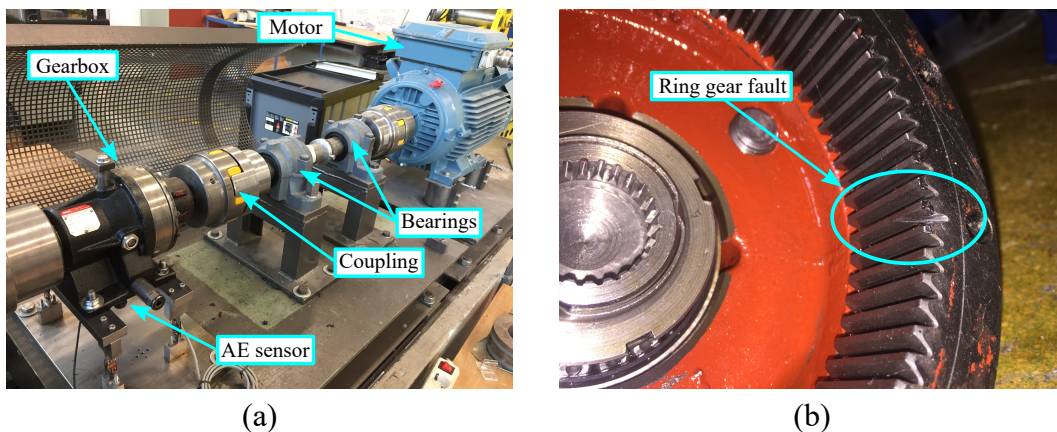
Planetary gearbox test bench (a) and ring gear fault (b)
